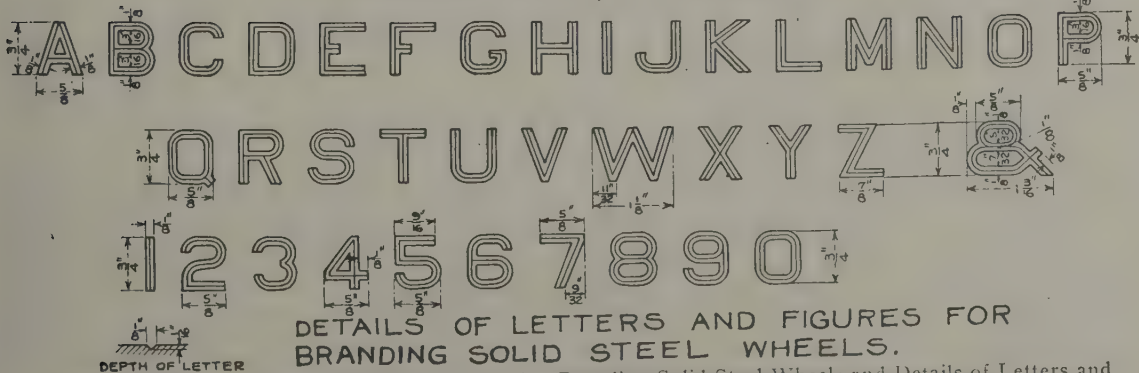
M. C. B. Recommended Practice for Branding Solid Steel Wheels and Details of Letters and Figures. (M. C. B. Sheet C-2.)
